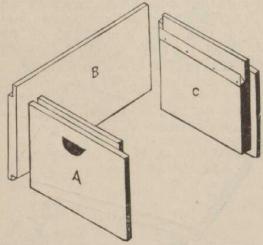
SHOWING HOW THE DIFFERENT PARTS OF THE HIVE GO TOGETHER, BOTTOM BOARD.
